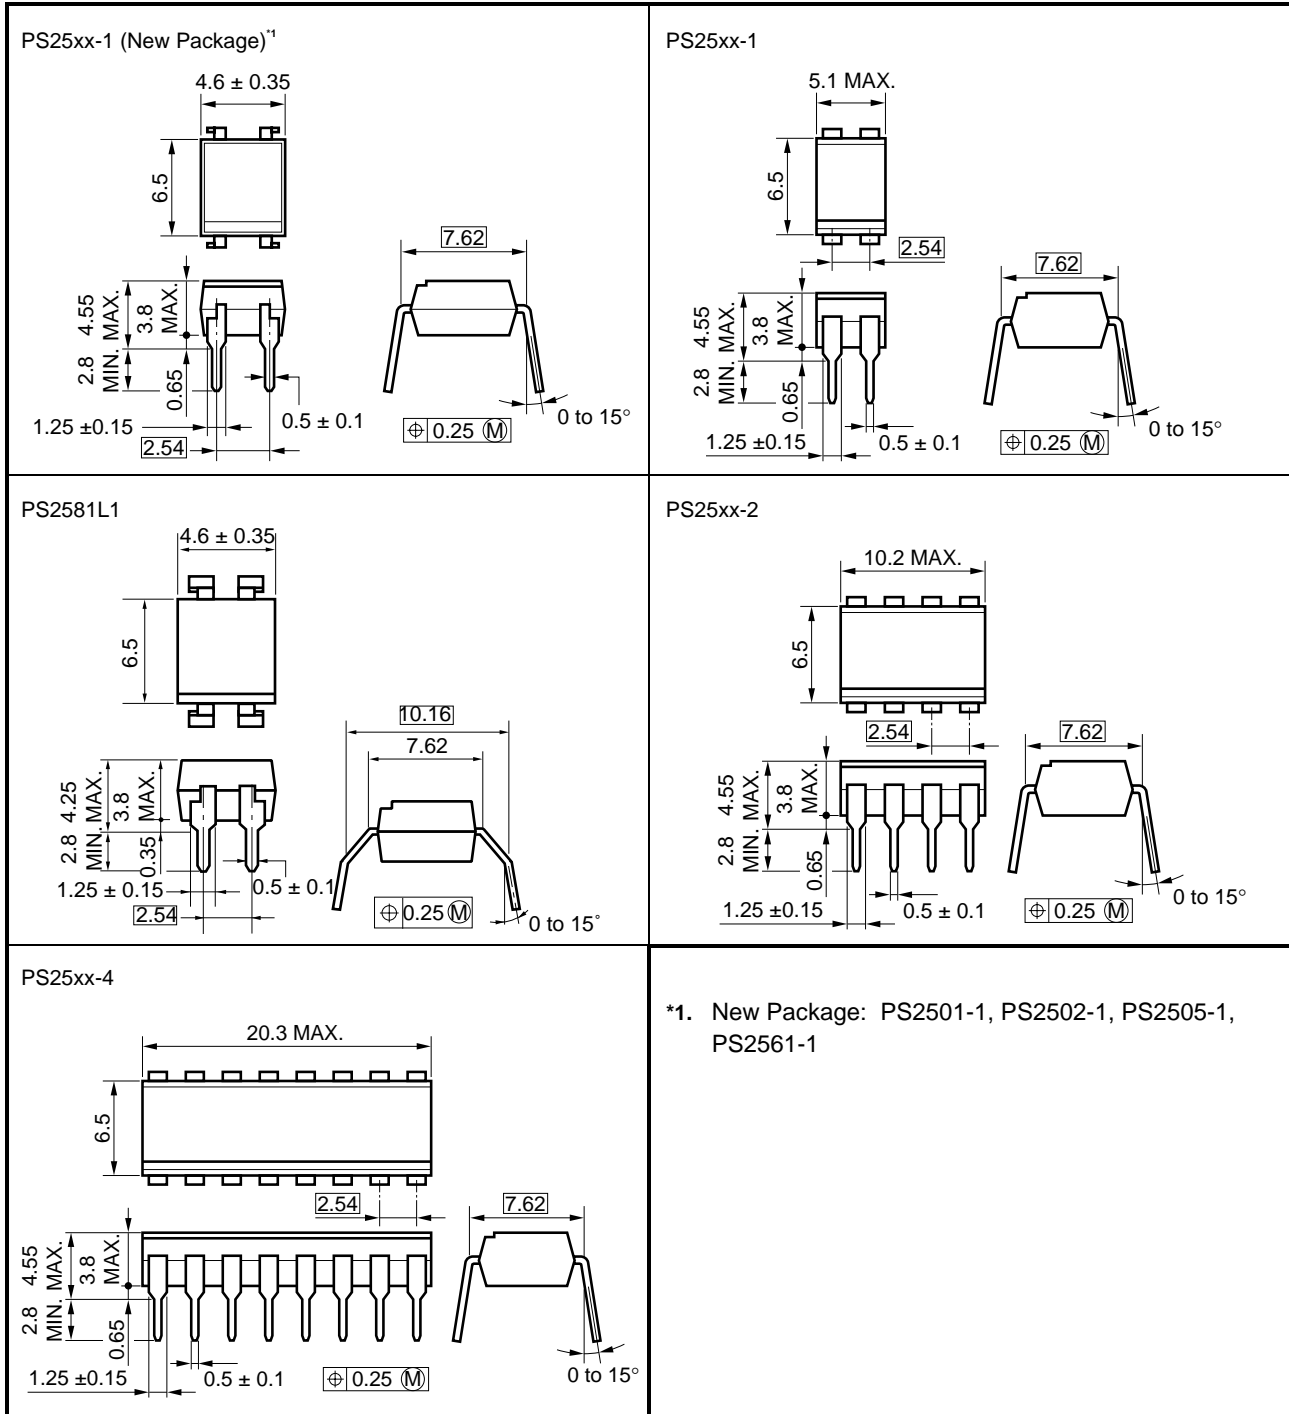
Package Dimensions of PS25xx Series (Unit: mm) (2/2)
